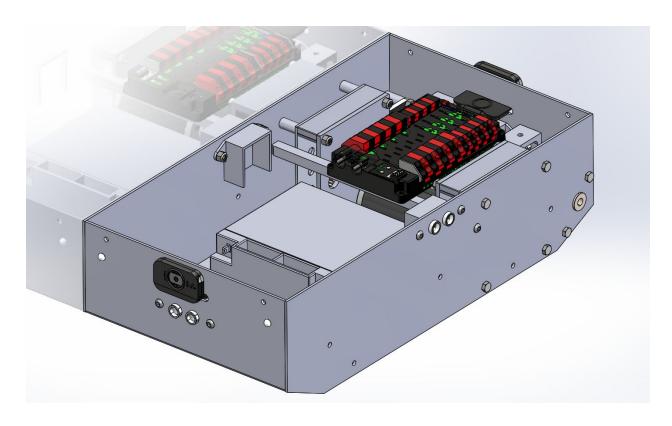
Base Chassis Sub-Assembly with internal components and sensors
